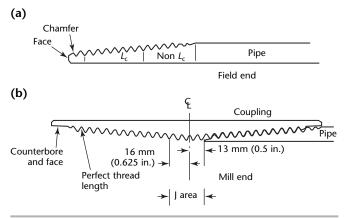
Round threads: (a) field end; (b) mill end. L_c indicates minimum length of full crested threads.
